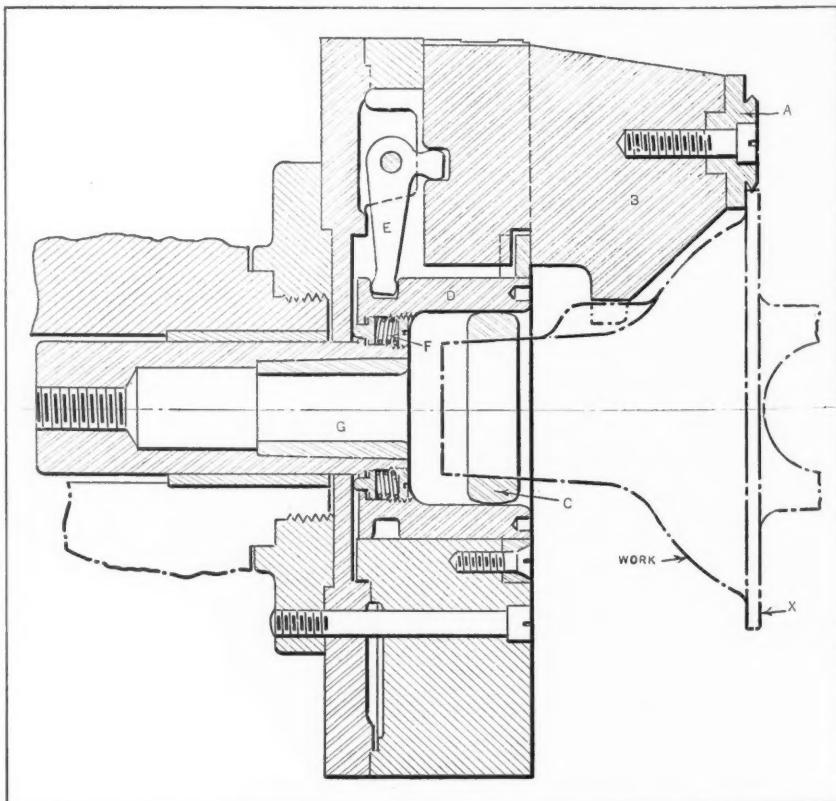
Chuck Used in Machining an Automobile Rear-axle Housing
